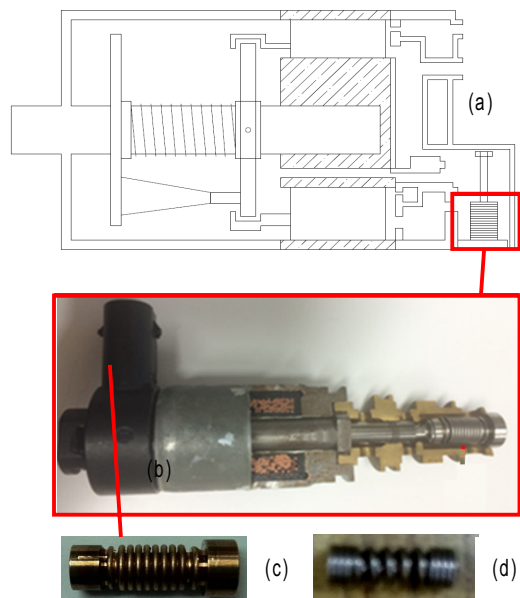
(a) Schematic of compressor, (b) photograph of cross-sectioned control valve, (c) bellows set, and (d) inner spring
